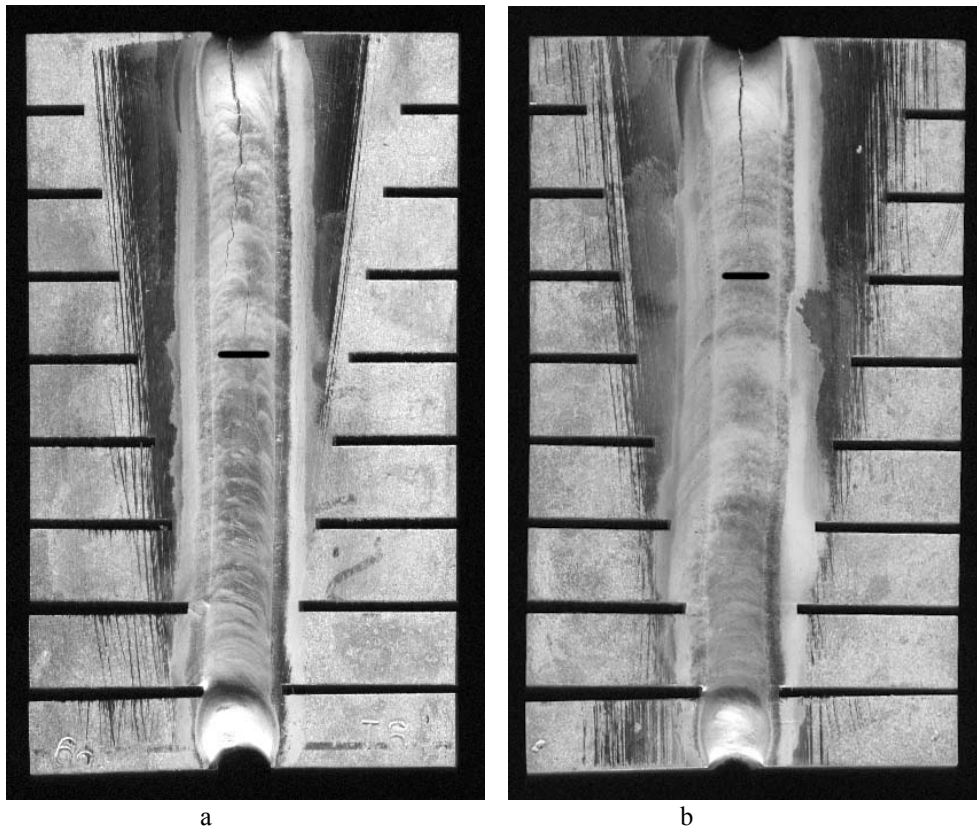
Nature of cracking in the welds on Houldcroft samples in arc welding of test alloys L6.1 (a) and L11 (b) without a filler. X1
